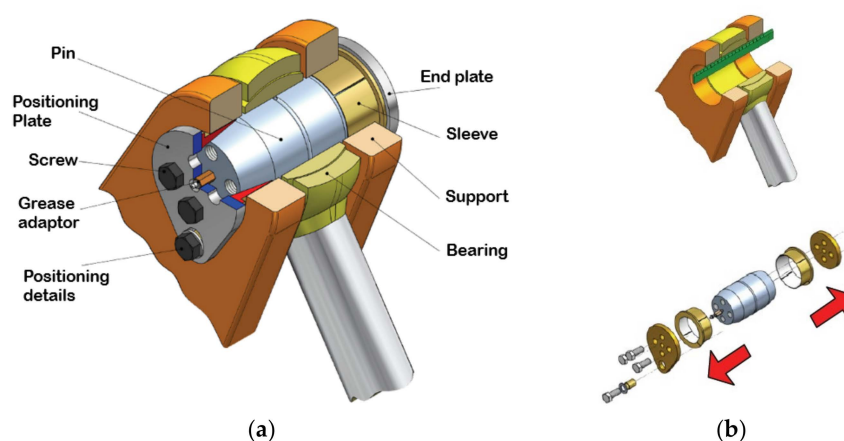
Illustration with section view of EPS. (a) EPS installed in a joint (b) Exploded view.
